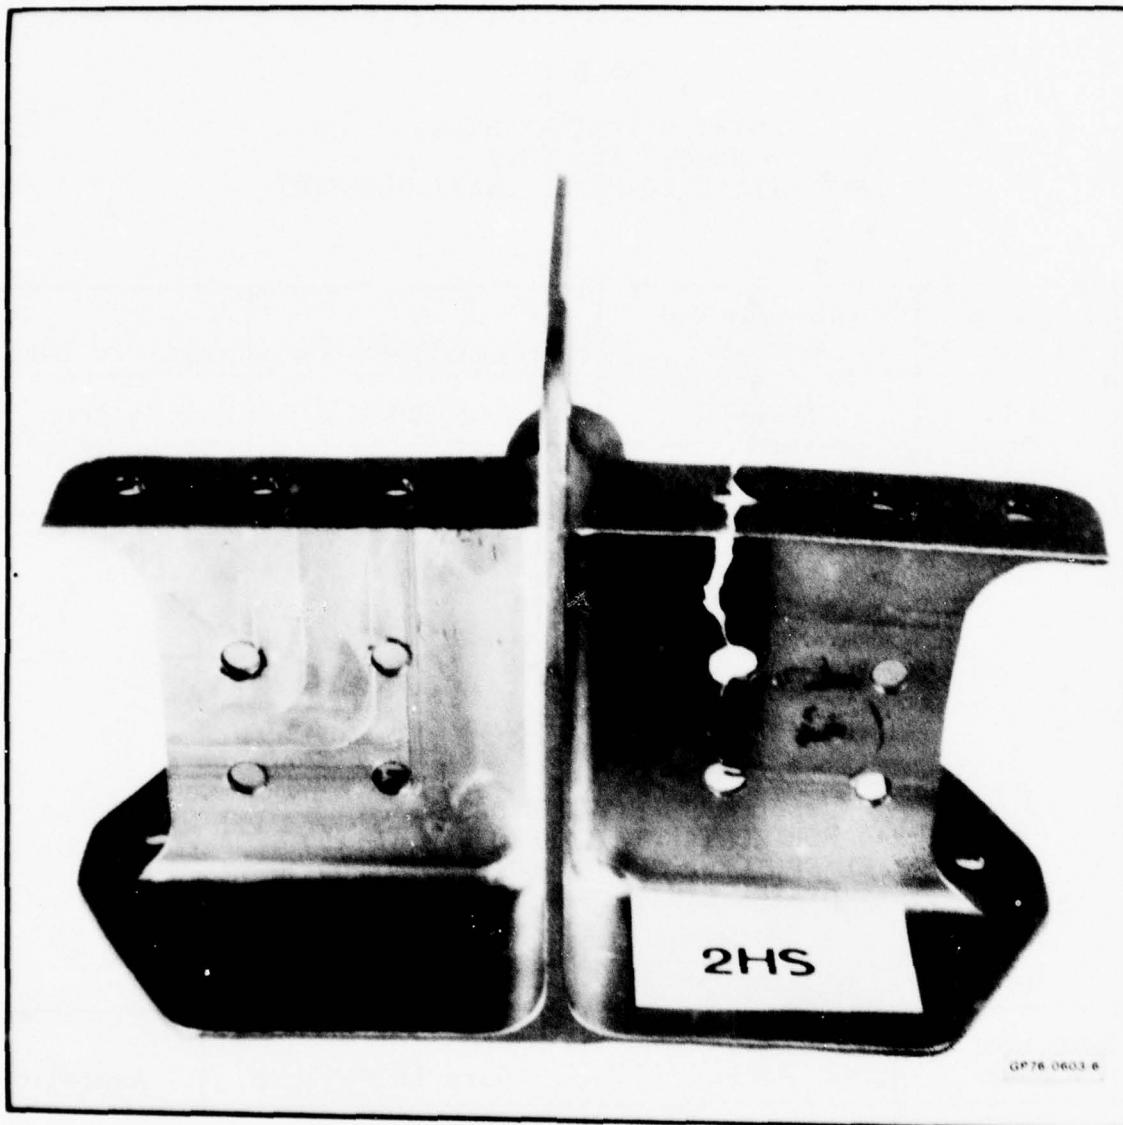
Hot isostatic pressed and machined keel splice former failed in static test.
